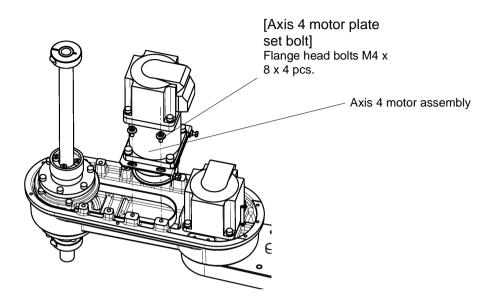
Mounting axis 4 motor assembly (KHL-300, KHL-400)
